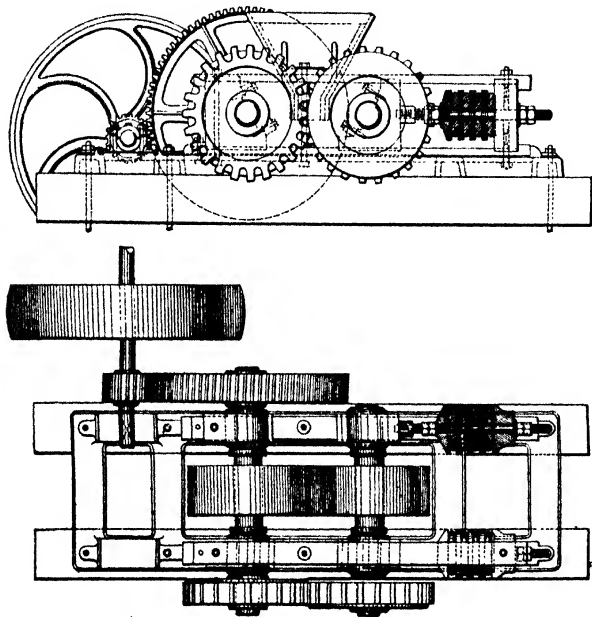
Geared high-speed rolls. Elevation and Plan.
